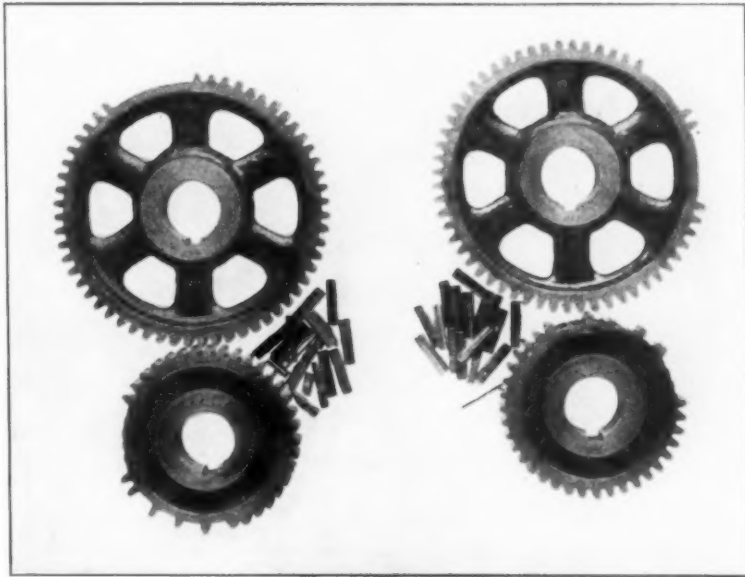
40 TOOTH ENGAGING 60 TOOTH, TESTS 010 AND 012, SERIES 1
